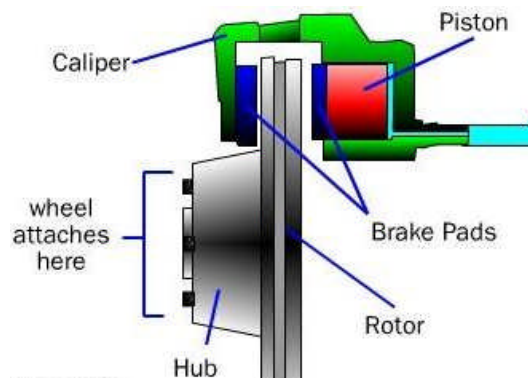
Schematic of the hydraulic fluid flow into the rotor of disc brake system
